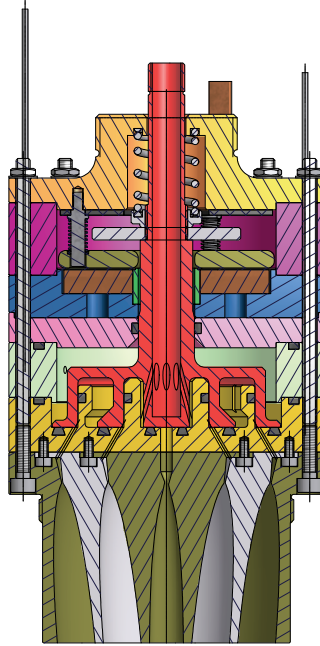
Cross-sectional view of the tri-axial gas puff valve showing nozzles, plena, and valve mechanism.
